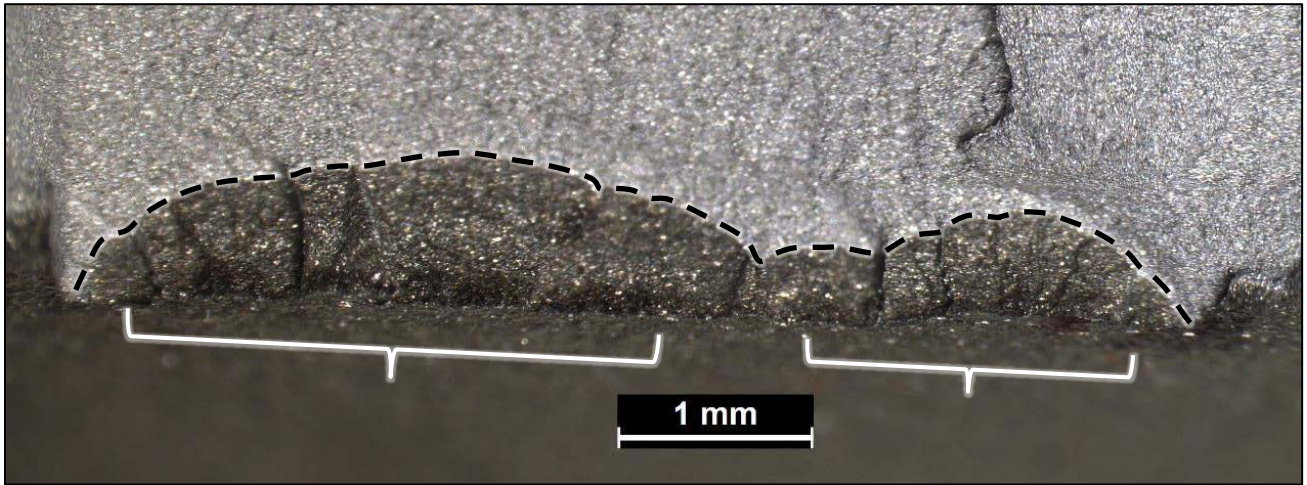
Overall view of the crack fracture surface of blade N after opening by lab fracture. Dashed lines indicate the crack boundary. Unlabeled brackets indicate the location of fatigue origins. Photo courtesy of Safran Aircraft Engines.
